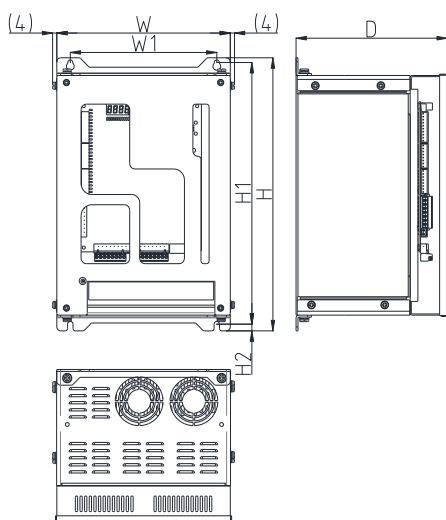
SHIELD TYPE EXTERIOR DIMENSION
